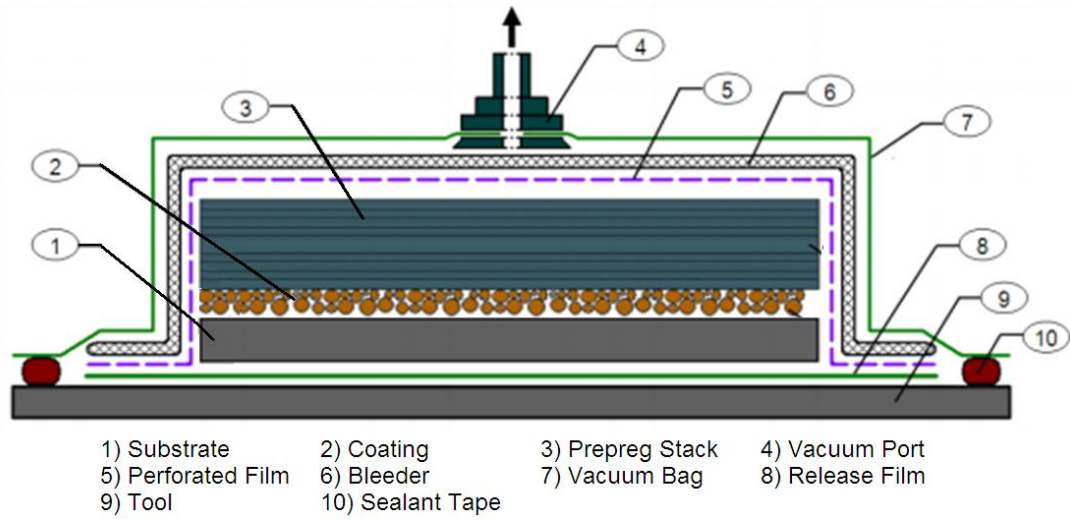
Vacuum Bagging Method for Manufacturing Metallized CFRC[24]
